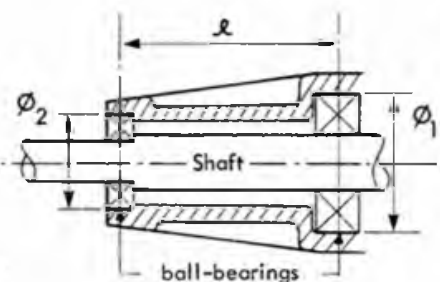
Shaft and bearings in an aluminium crankcase.
